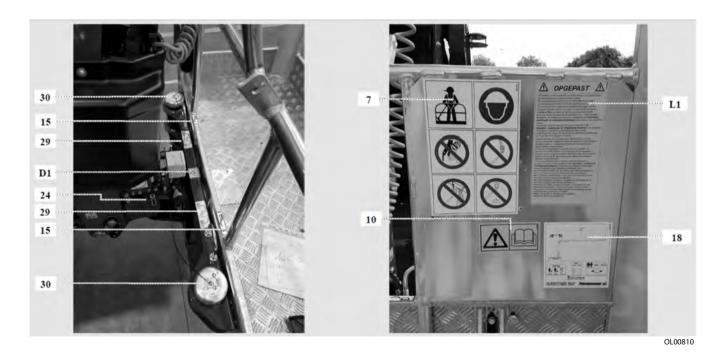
X33JP - Decal Installation - Sheet 7 of 10
